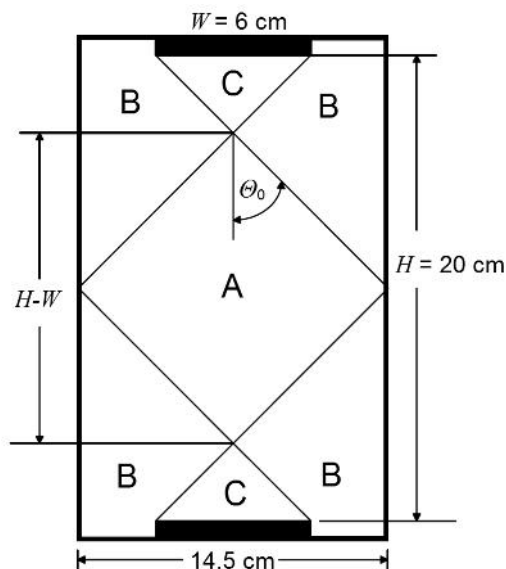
Wider bias extension shear specimen with shear zones indicated (adapted from [66])
